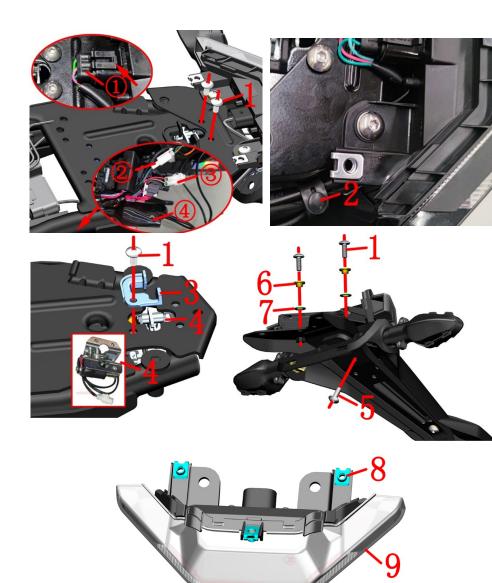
REAR COVER		Rear mud board component 1	CHK	40)
